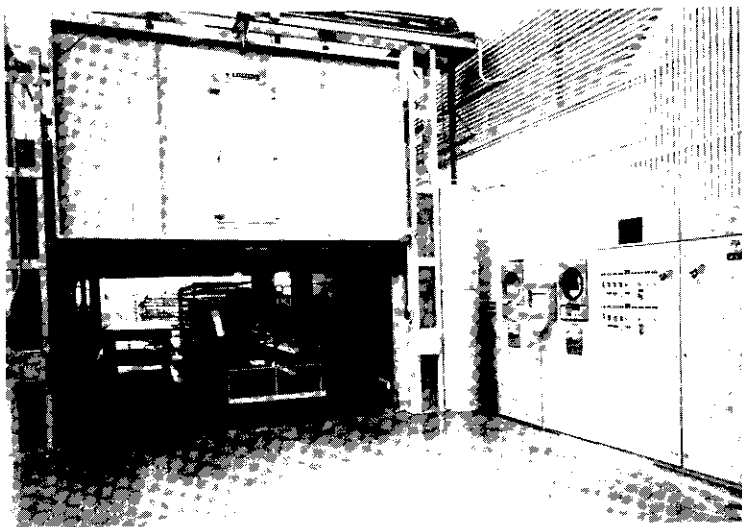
TYPICAL OVEN FOR PROCURING ADHESIVE PRIMER
